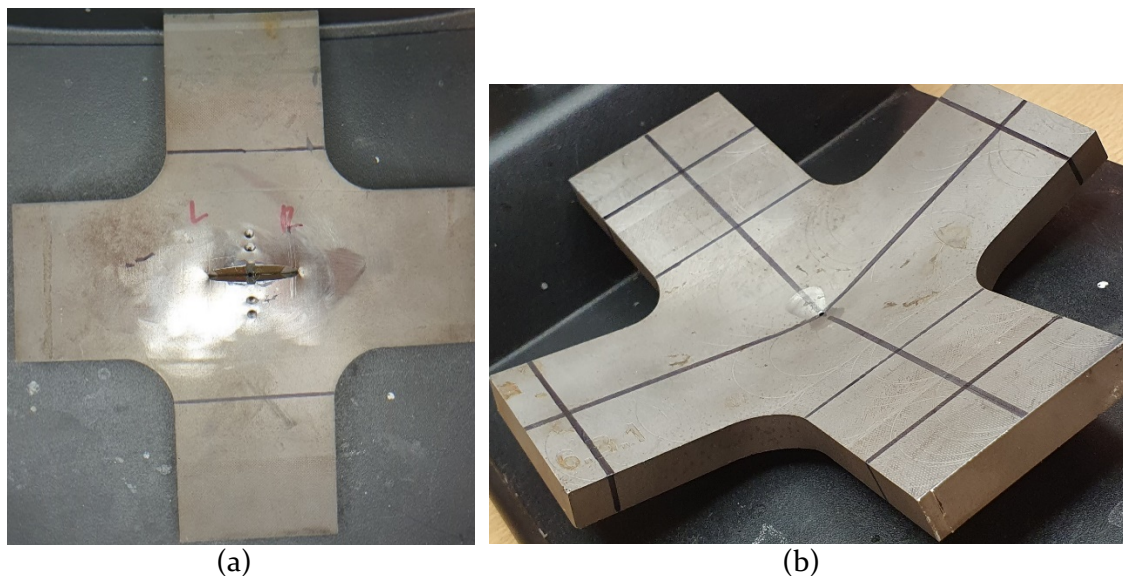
Specimen 5PB 6B1 post testing (a) top view (b) bottom view
